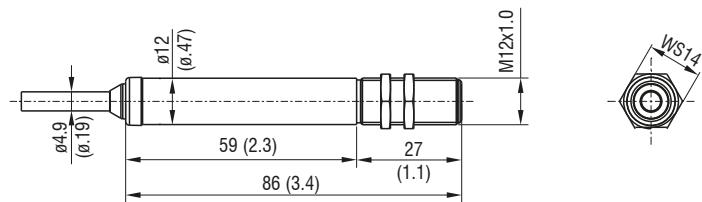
Dimensional drawing thermoMETER FI-SF15-C1, dimensions in mm (inches, rounded off)
